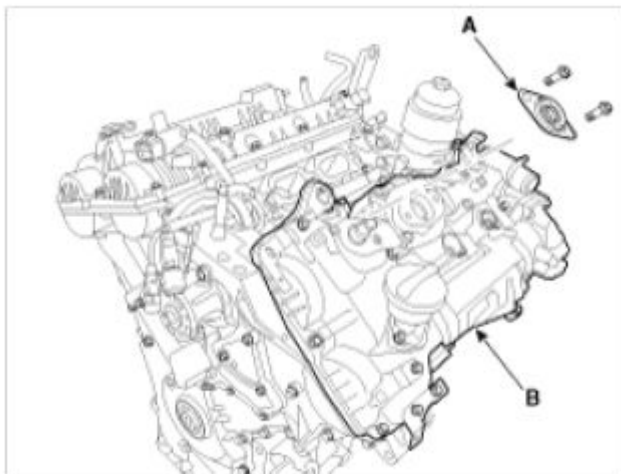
Identifying CVVT Oil Control Valve Cap And LH Cylinder Head Cover
